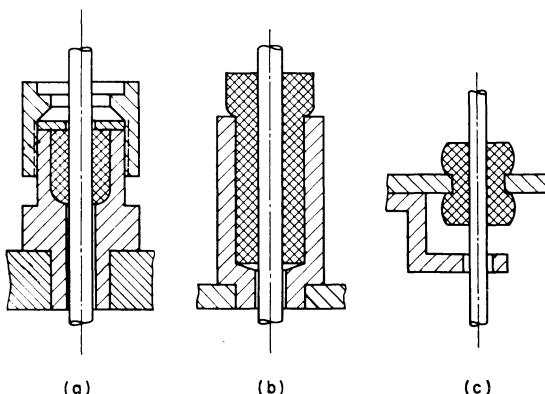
Shaft seal with cylindrical gaskets: (a) adjustable; (b) long path; (c) with pilot bearing. After Lauritsen⁷⁴⁶ (*Courtesy of The American Institute of Physics*)
